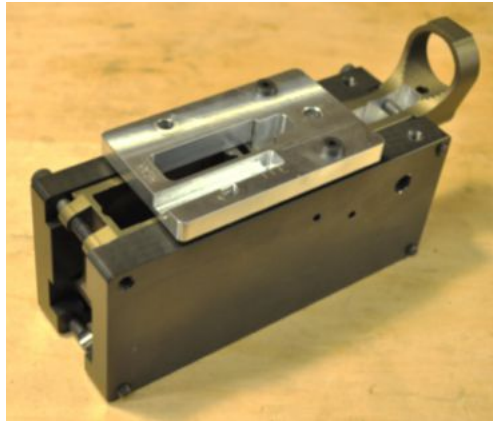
(left) installation of the trigger pocket jig to locate starting hole for trigger hole
